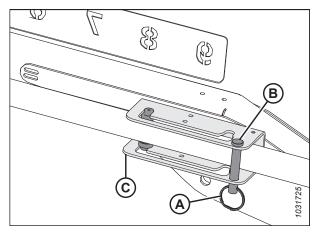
Fore-Aft Cylinder Adjustment Type 2 – Forward Position
